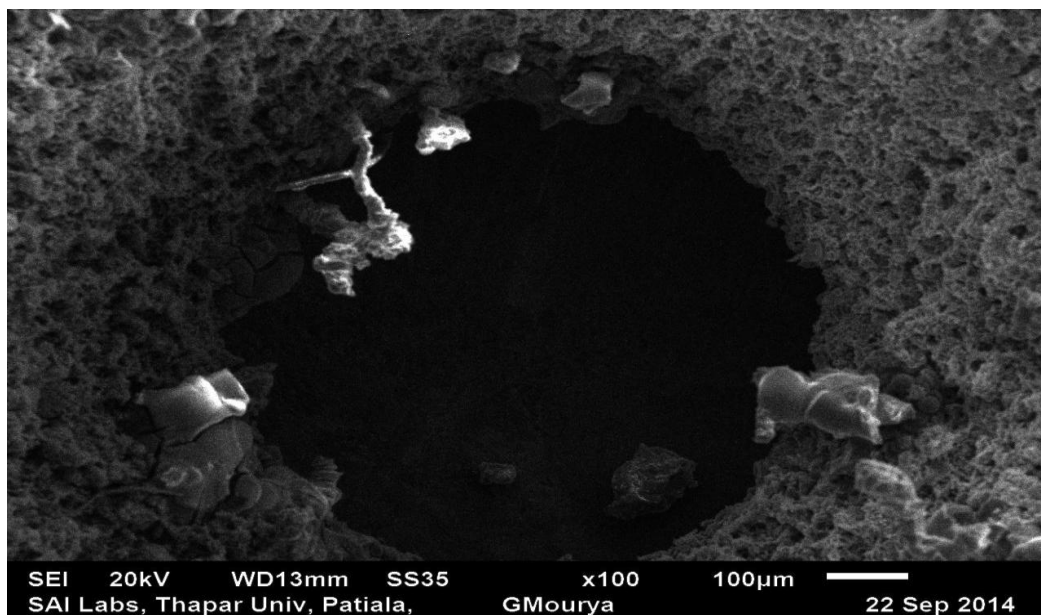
EDS Analysis of Micro Machined Surface at Higher Level of ECMM Machining Parameters (Fig. 4.85 (f))
